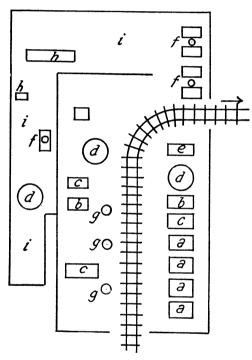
Plan of Diamond Slate Co. mill, Pen Argyl, Pa.: a, Saws; b, small edging saws; c, planers; d, rubbing beds; e, carborundum machines; f, buffers; g, derricks; h, benches for edge fitting; i, finished-stock storage.
